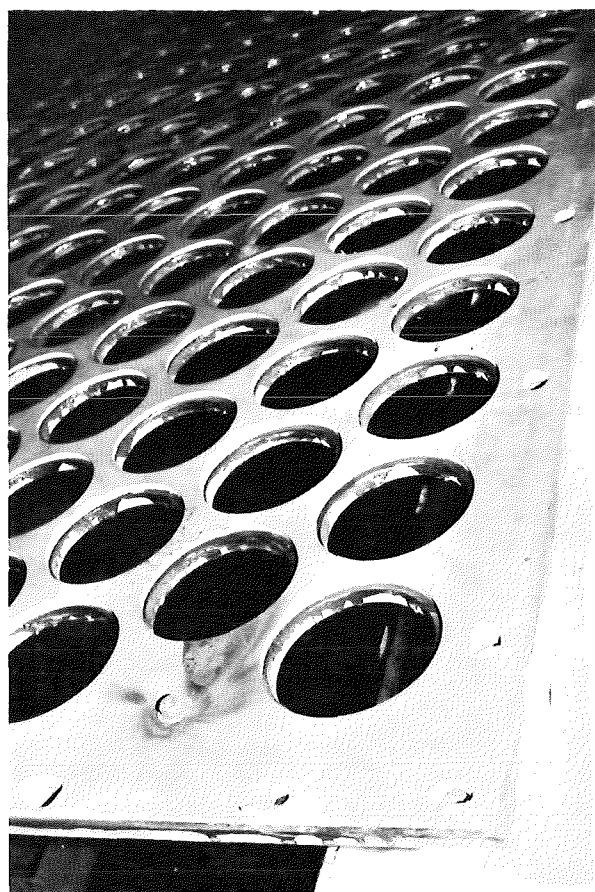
STEEL SCREEN WITH EAR DAMPING MATERIAL APPLIED TO BOTTOM SURFACE (SHOWN EAR SIDE UP FOR DETAIL).
